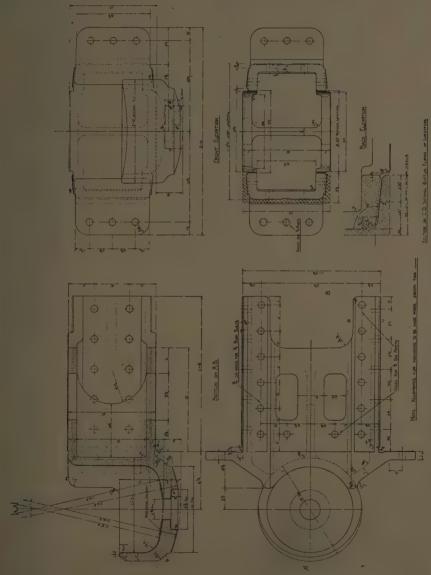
Cast steel outside twin coupler of articulated carriage, London & North Eastern Railway.
